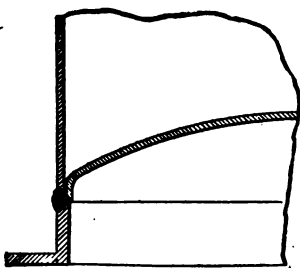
Angle-ring welded on the bottom of a cylindrical vessel.
